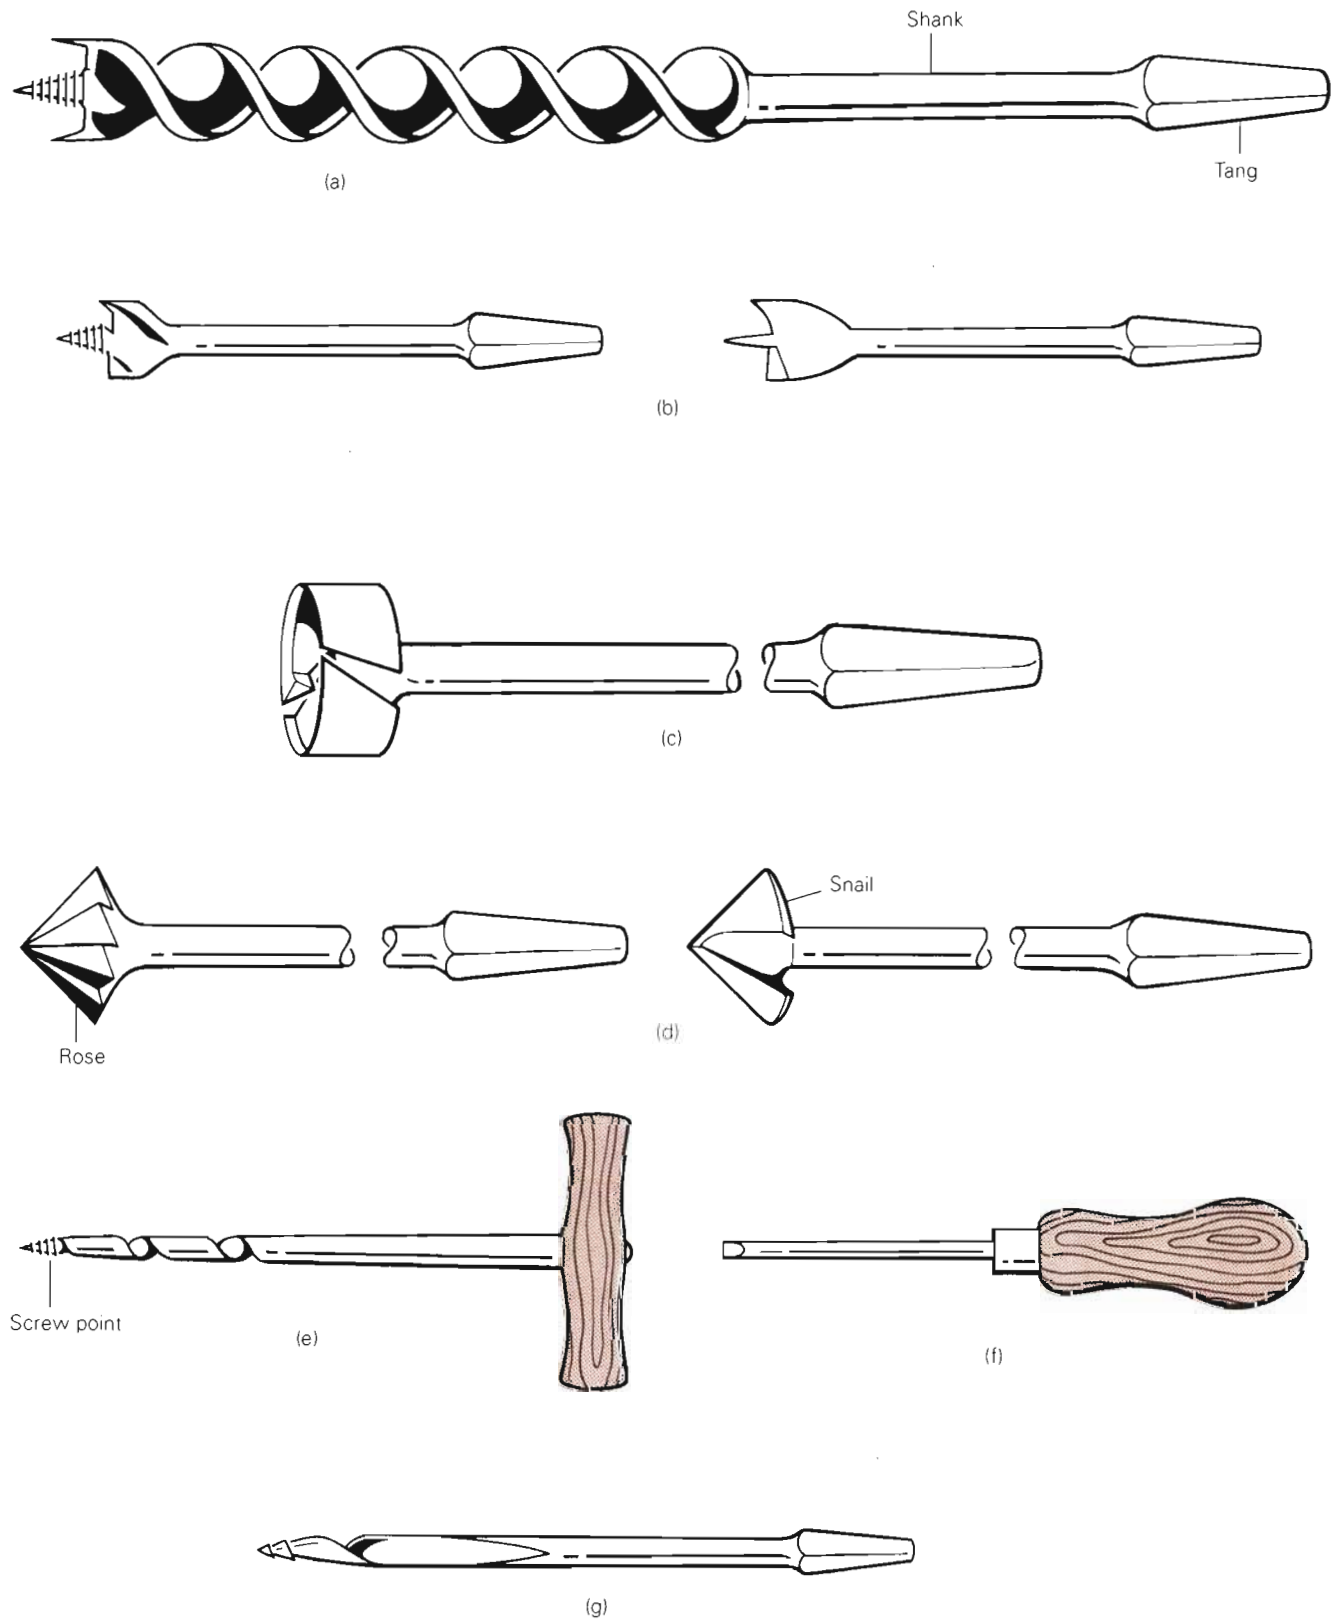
Boring tools: (a) auger bit, (b) centre bits, (c) Forstner bit, (d) countersink bits, (e) gimlet, (f) bradawl (g) cobra bit.
